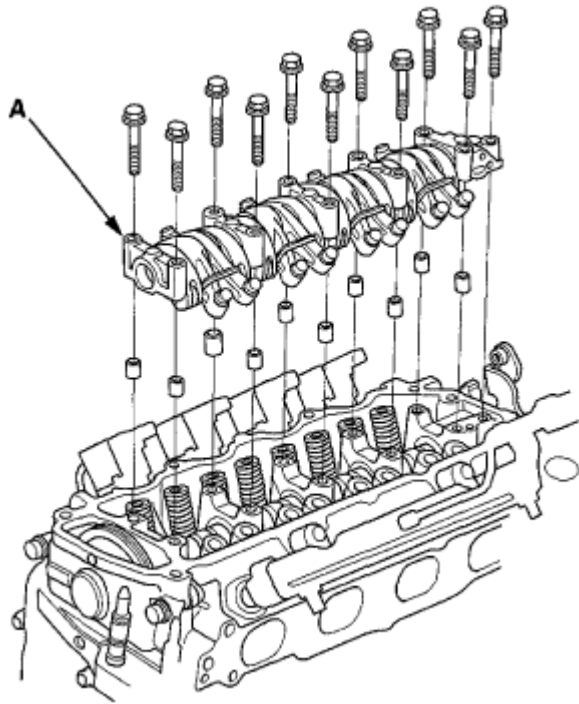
Locating Rocker Shaft Mounting Bolts And Rocker Arm Assembly
